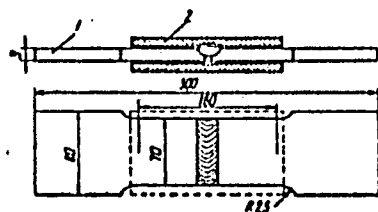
Welded joint with an enlarged sectional view.
